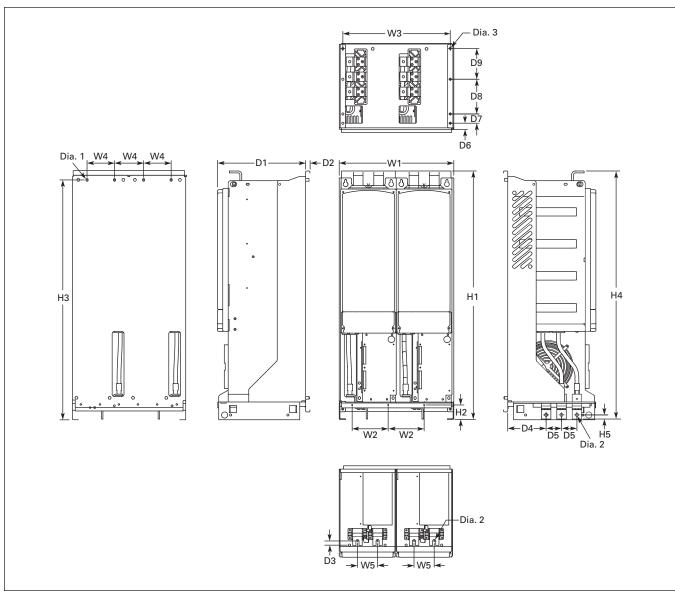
9000X Dimensions, FR13 Open Chassis Converter
